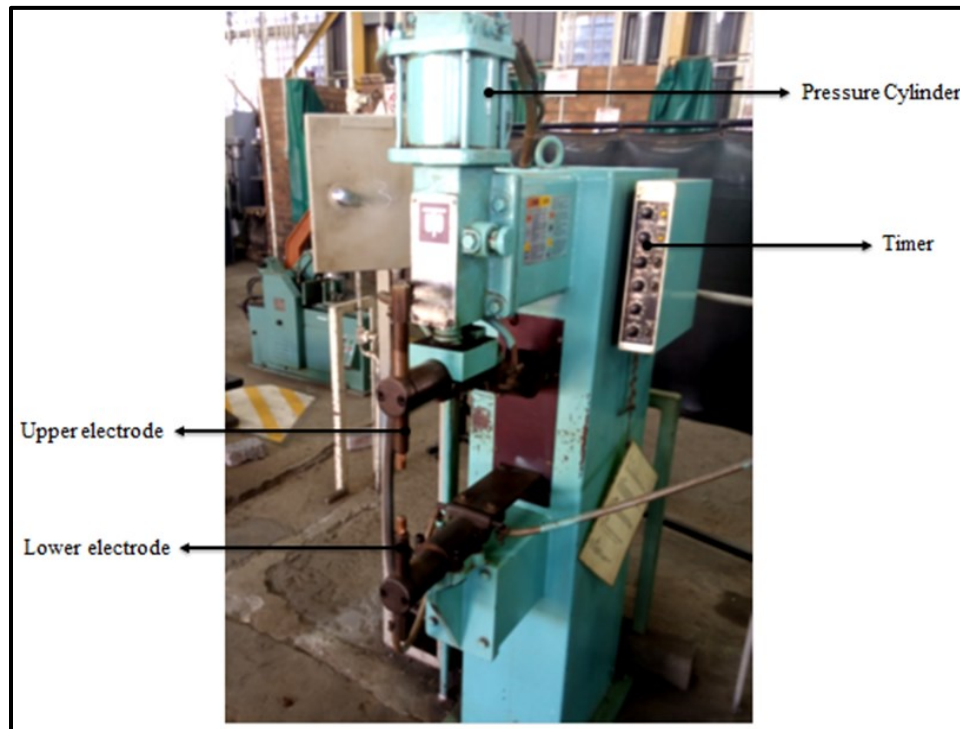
Spot welding machine used (with permission from Nakawa Vocational Training College)
